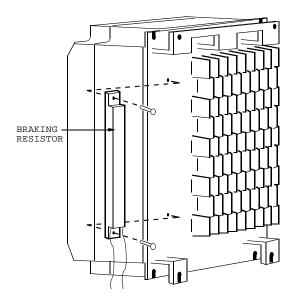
Mounting Braking Resistor on Heat Sink of GPD 503 or VCD 703
